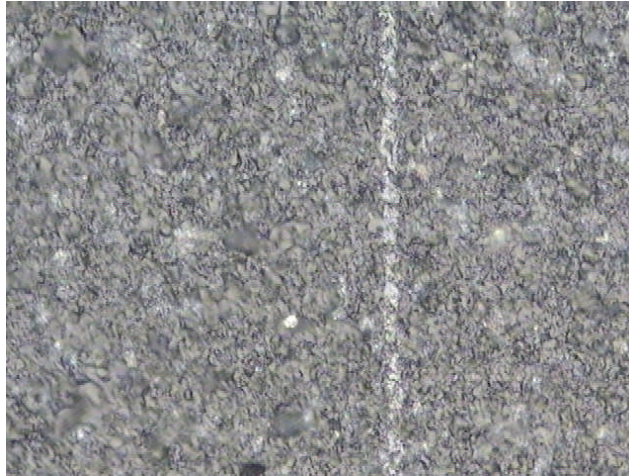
7 um Wide braze joint of lapped SC30 test plates
